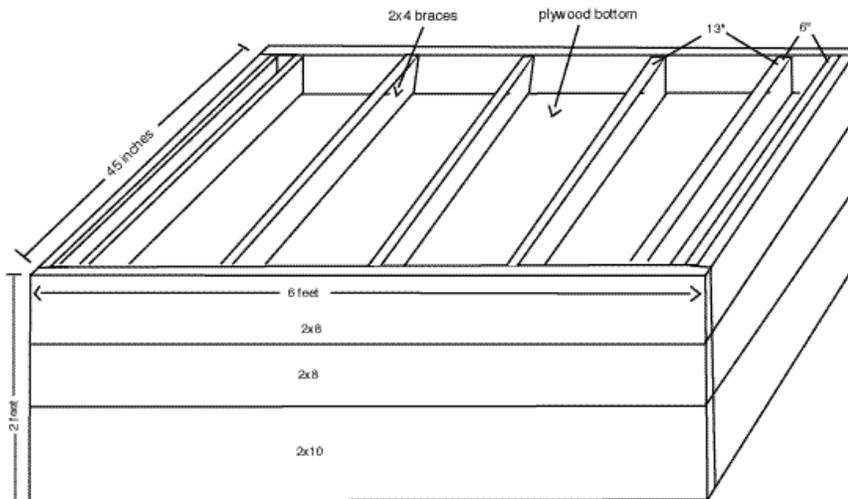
Top section of planter shown upside down to view construction. The first 2x4 brace is placed directly against the outside piece. The second bottom brace on either side is in 6 inches, then the remaining three braces are 13 inches apart. Drill holes at one-foot intervals before turning over.
